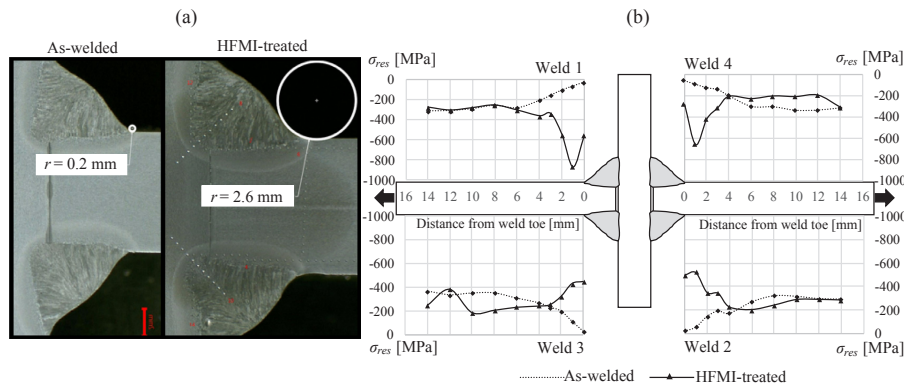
(a) Weld toe geometry; (b) surface residual stress distribution along specimen surface in as-welded and HFMI-treated conditions.
